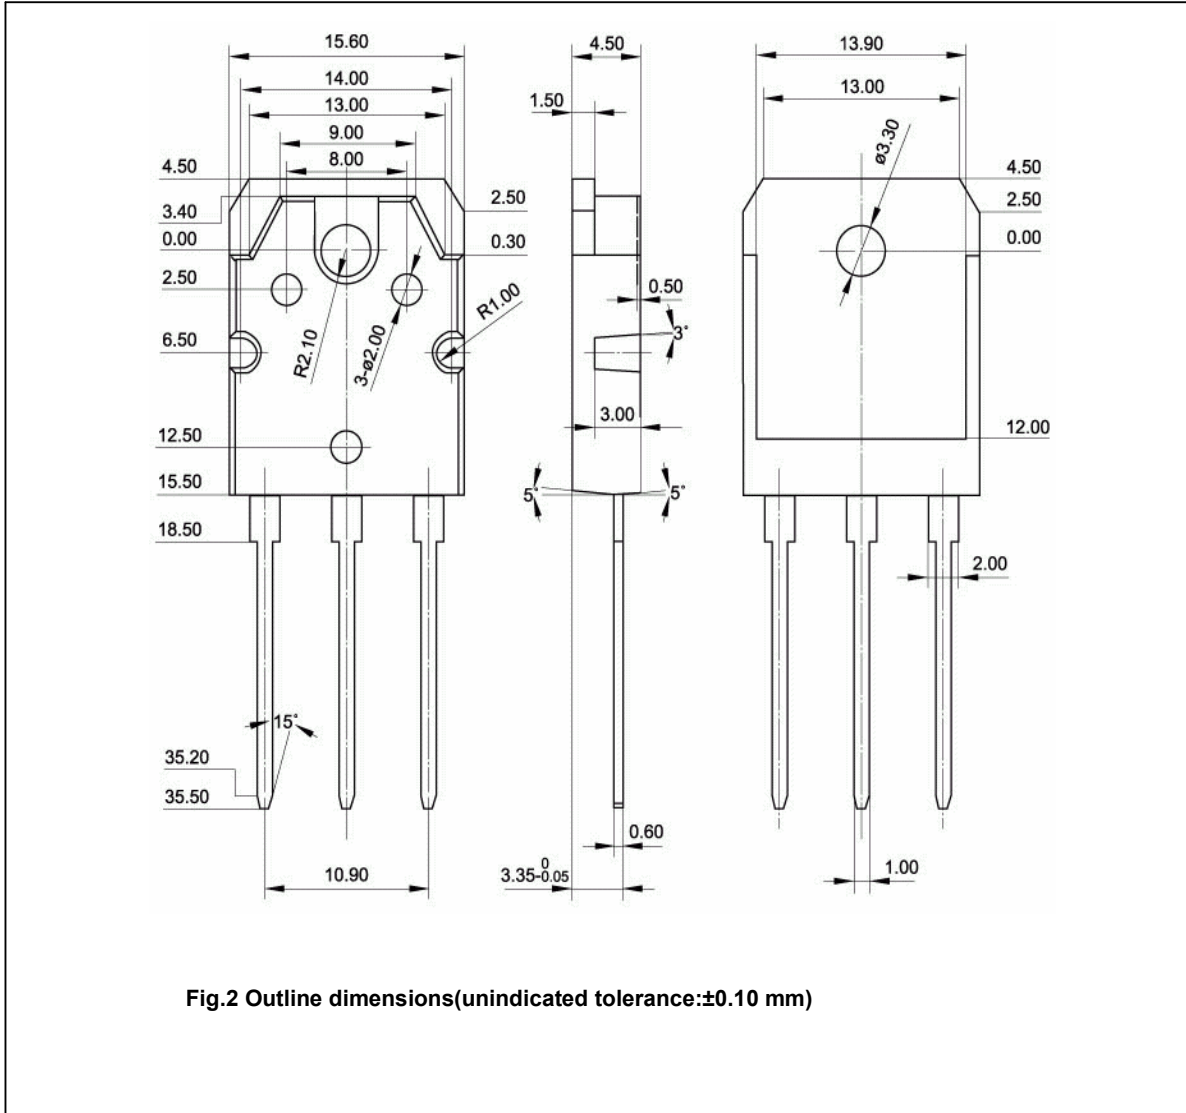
Outline dimensions(unindicated tolerance: $\pm 0.10$  mm)
